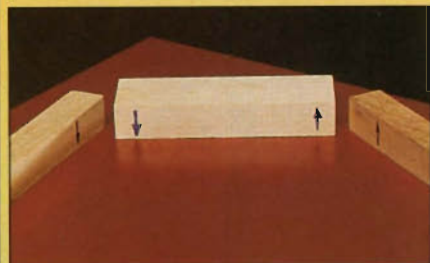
Photo A: Dry-assemble frames, then mark a common face at each joint. To slot parts, lay them common face down.
